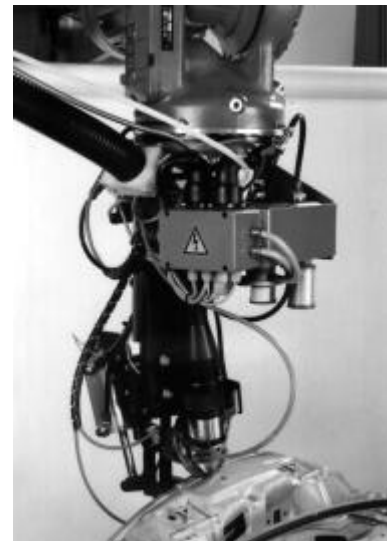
(right): Welding head for car door welding with diode pumped Nd:YAG laser (Source: Porsche AG, Kuka GmbH)
